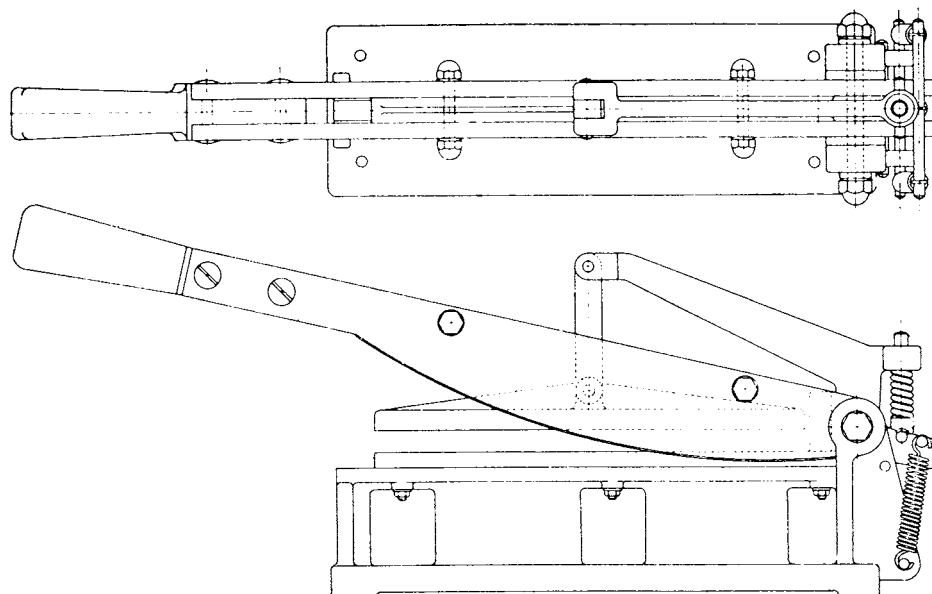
Double-Bladed Cutter for Making Type B Specimens
